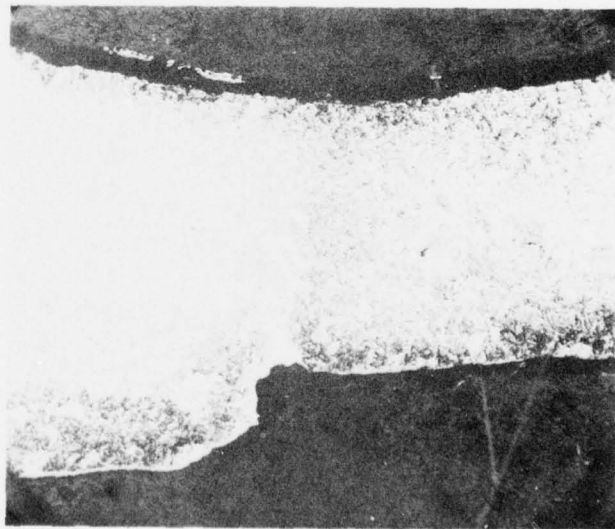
Photomicrograph of Section through Edge of Weld on the other side from the Fracture. This is a Hand Repair Weld and shows Drop-through at the Back (bottom of photo), Undercutting and Decarburization. (40 X, Approx) Etched Nital.
